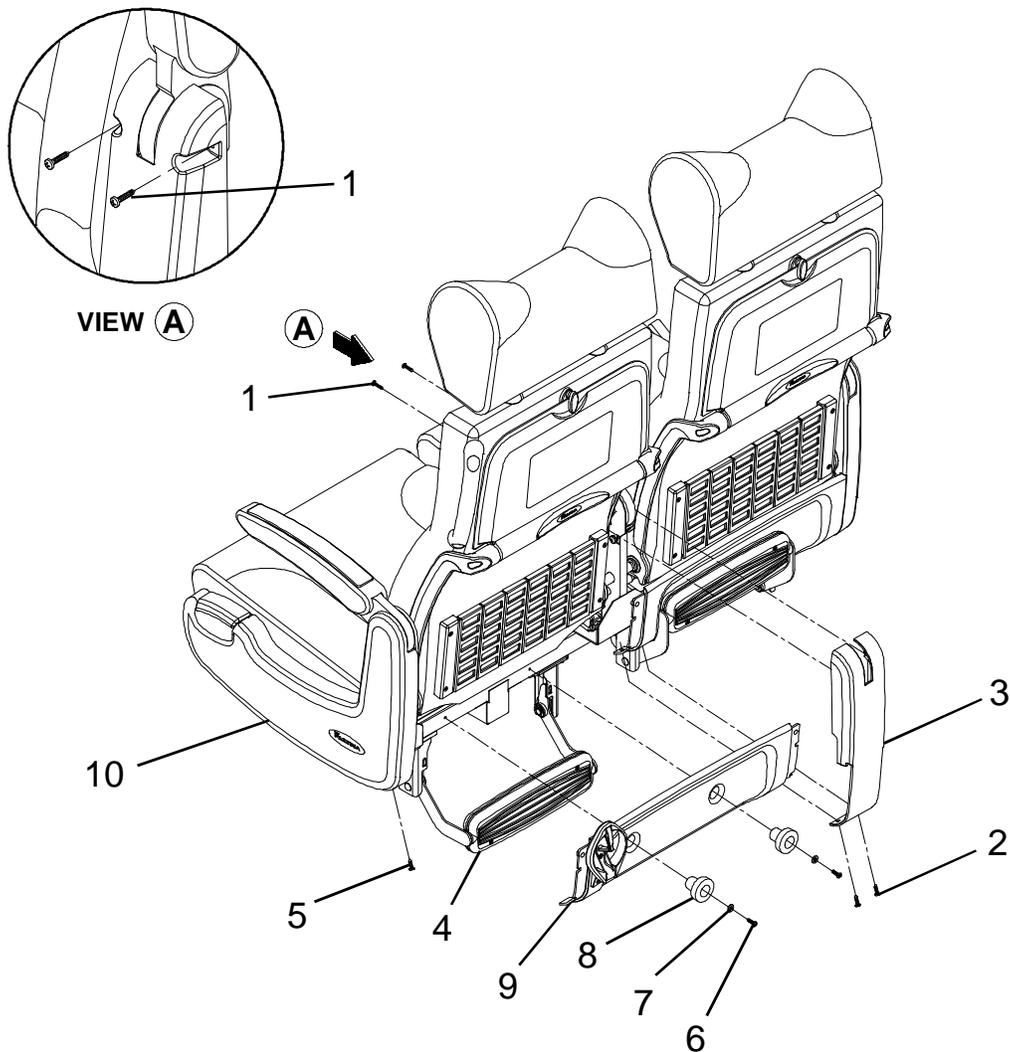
Footrest Bumper and Footrest Shroud Replacement
